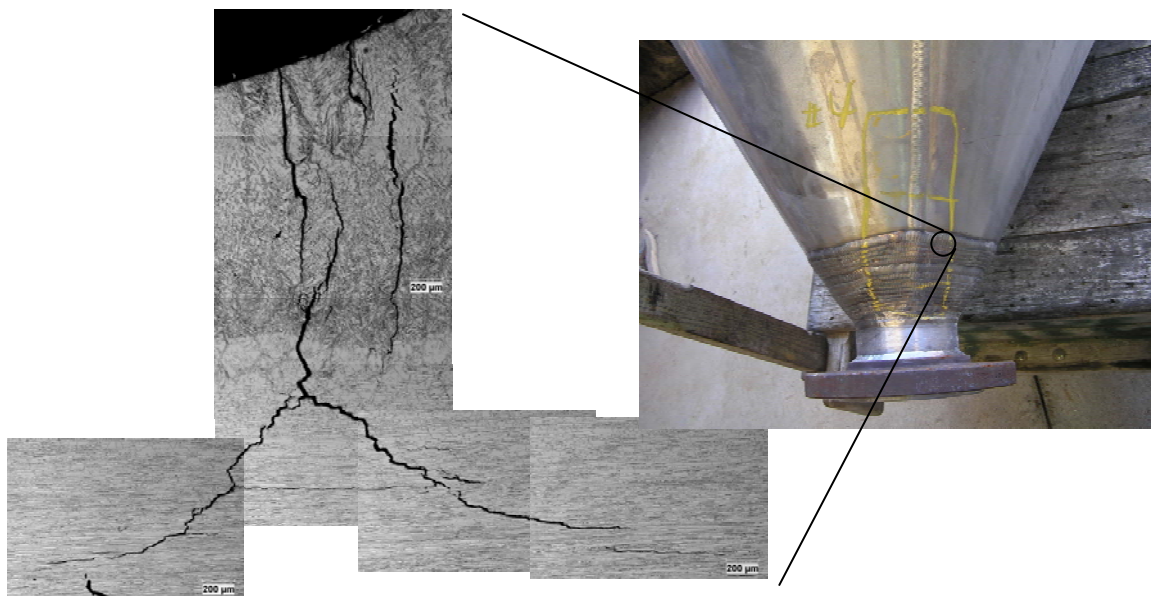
Stress corrosion cracking of 2205 DSS sand-separator cone in pulp mill.
